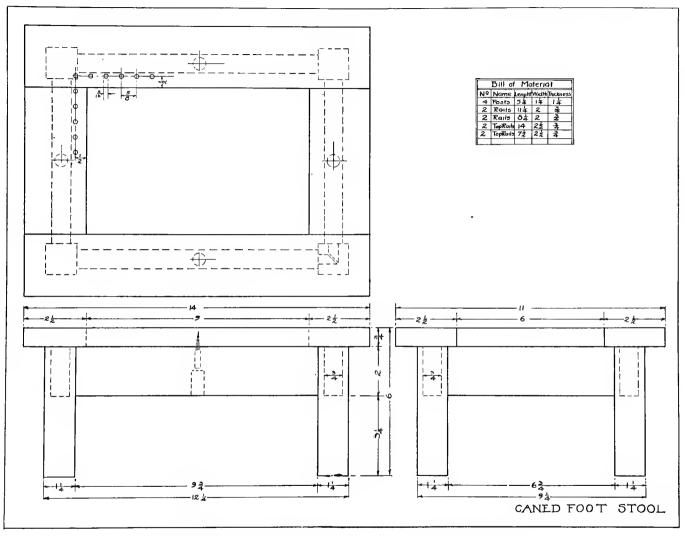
Working Drawing of Caned Foot Stool (Eighth Grade)
